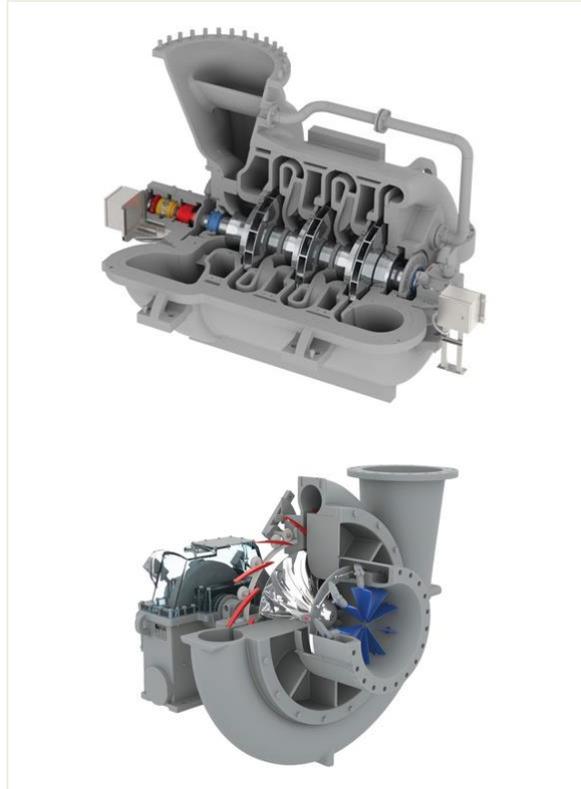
GE Centrifugal Compressors (Closed and Open Impeller Designs)[27]
